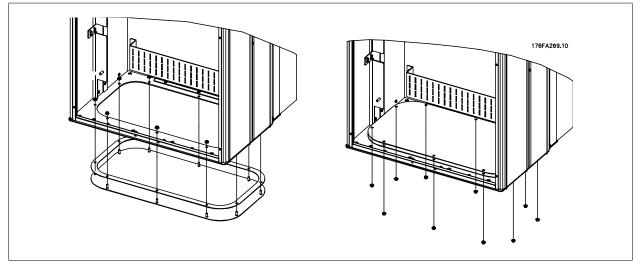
Mounting of bottom plate, E1 enclosure.
